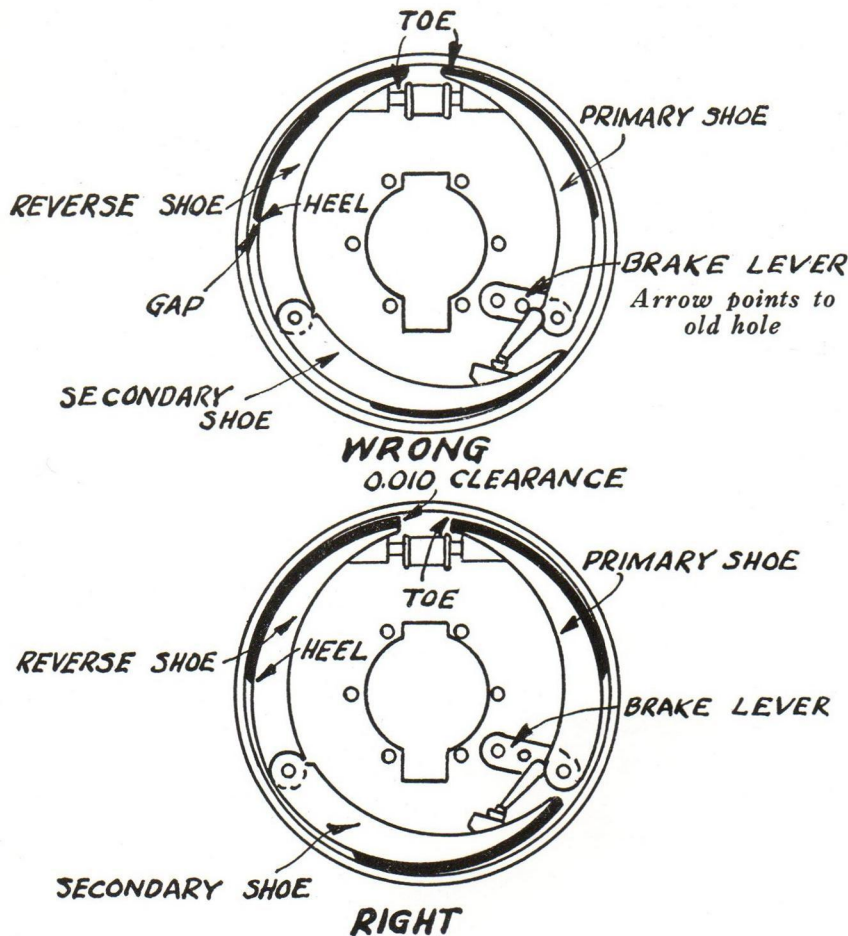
Top view shows toe contacting first. This is wrong. Lower view shows heel contacting first. This is correct. Lower view shows the brake levers as re-drilled to 3S specifications
